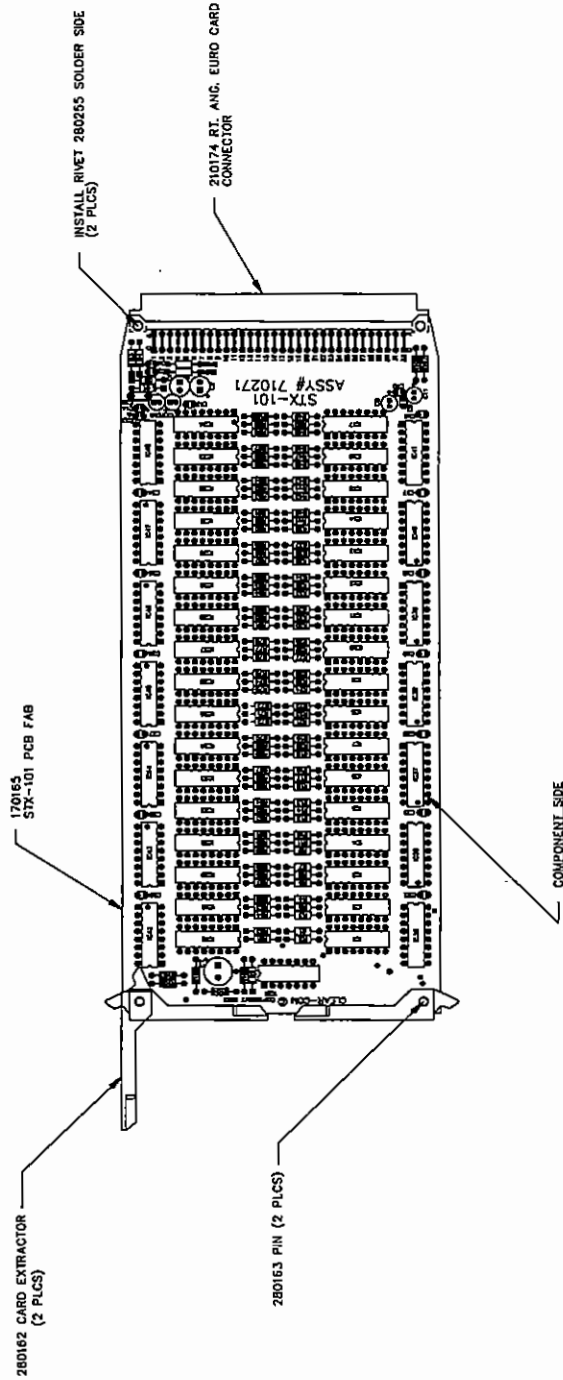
Assembly Drawing - STX-101, Rev. B
